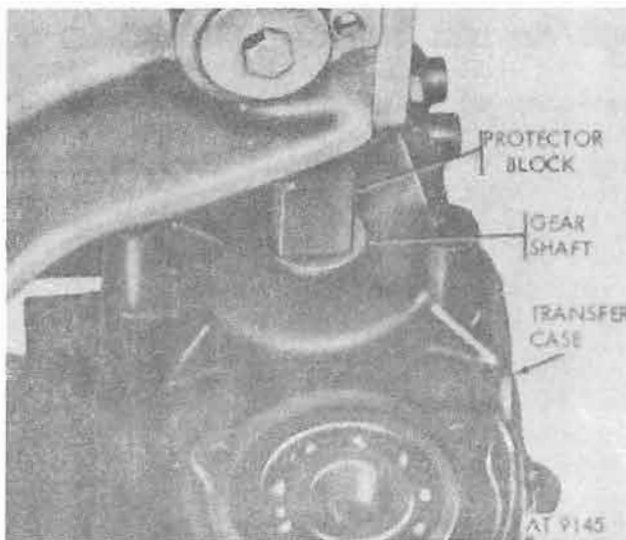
Pressing intermediate gear shaft from transfer case.
